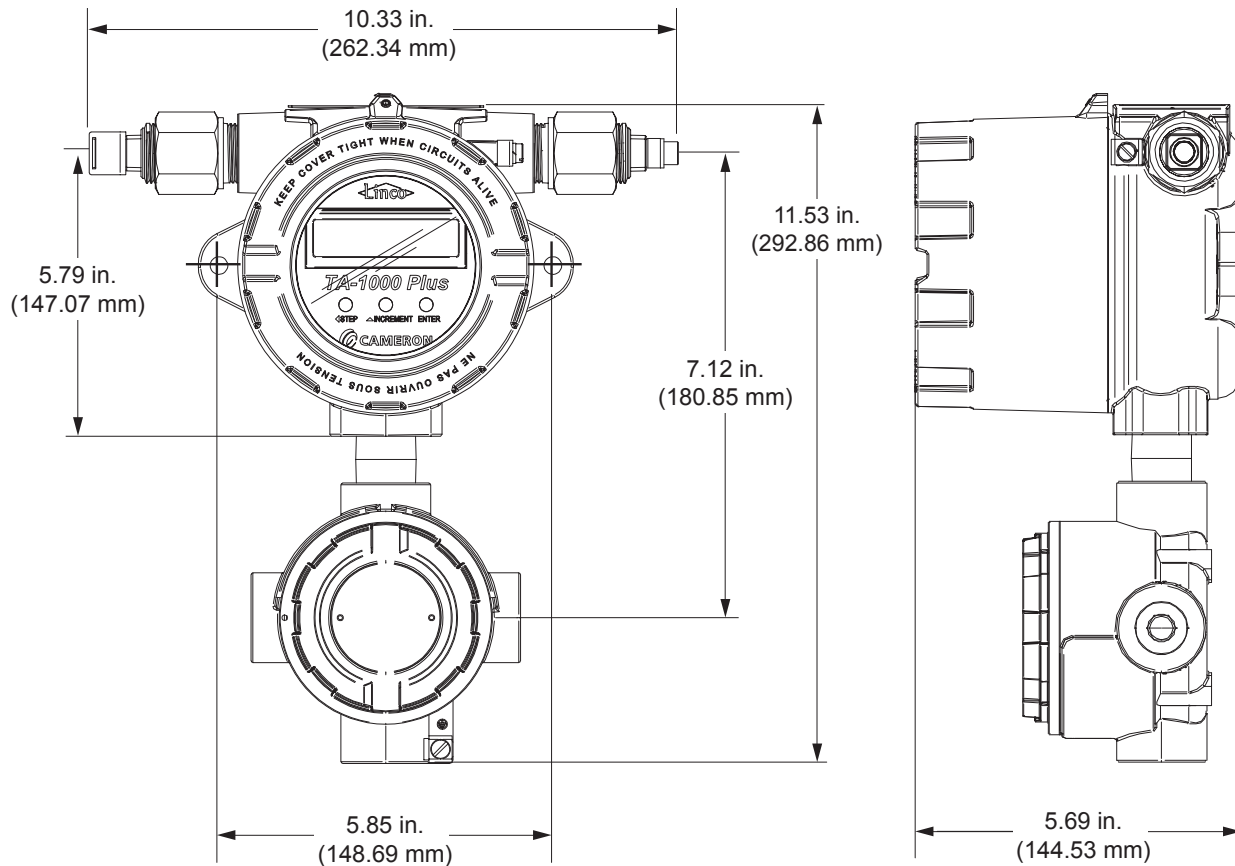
Typical explosion-proof package dimensions with optional terminal housing
